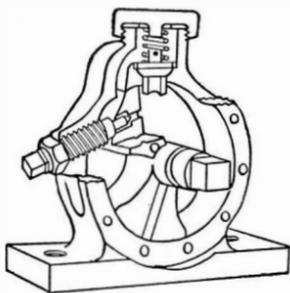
Hotchkin Shock Absorber With Cover Removed and Section Broken Away to Show Check-valve and By-Pass.
